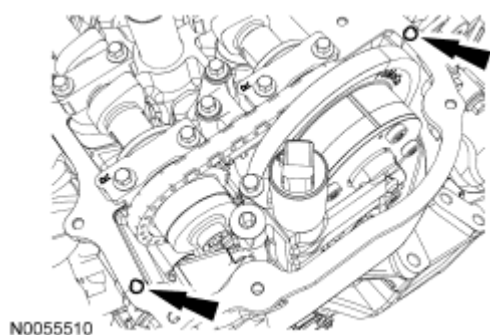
Applying Bead Of Motorcraft High Performance Engine RTV Silicone To Engine Front Cover-To-RH Cylinder Head Joints
